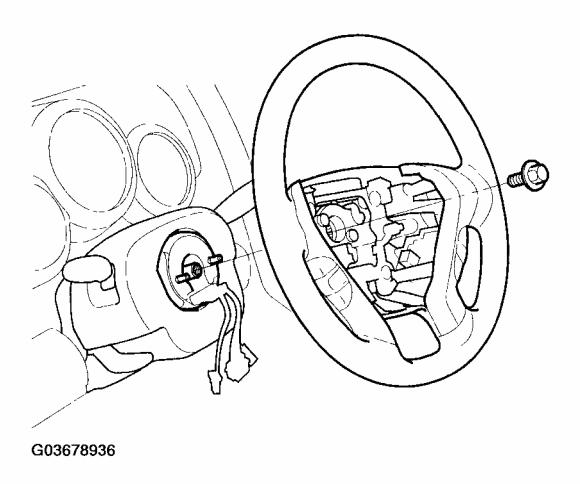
Removing Steering Wheel Bolt Courtesy of AMERICAN HONDA MOTOR CO., INC.
